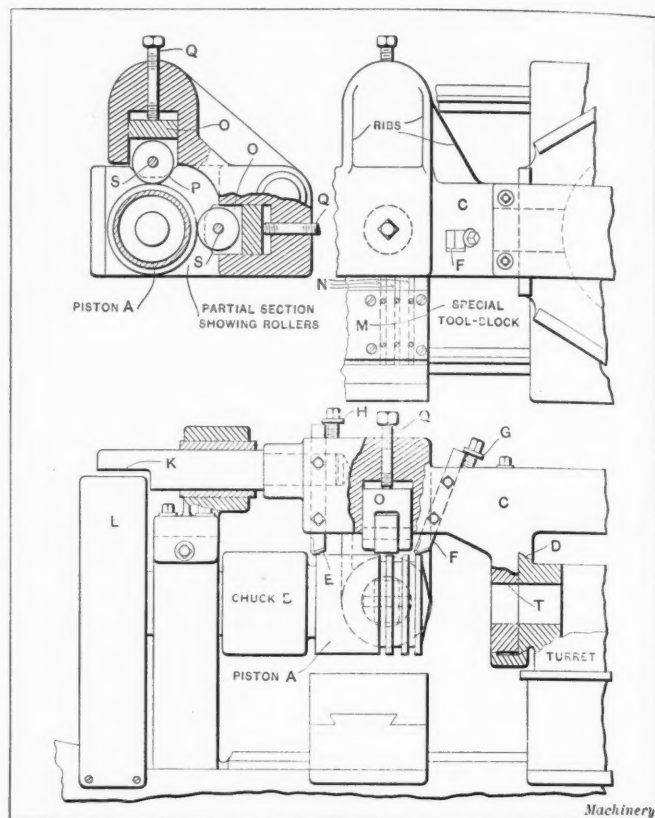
Multiple Turning Tool equipped with Pilot and Roller Back-rest
